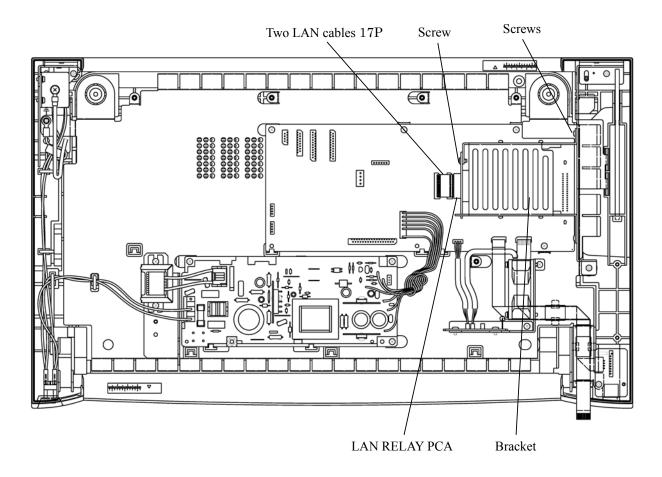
LAN RELAY PCA / LAN CABLE 17P removal and installation
